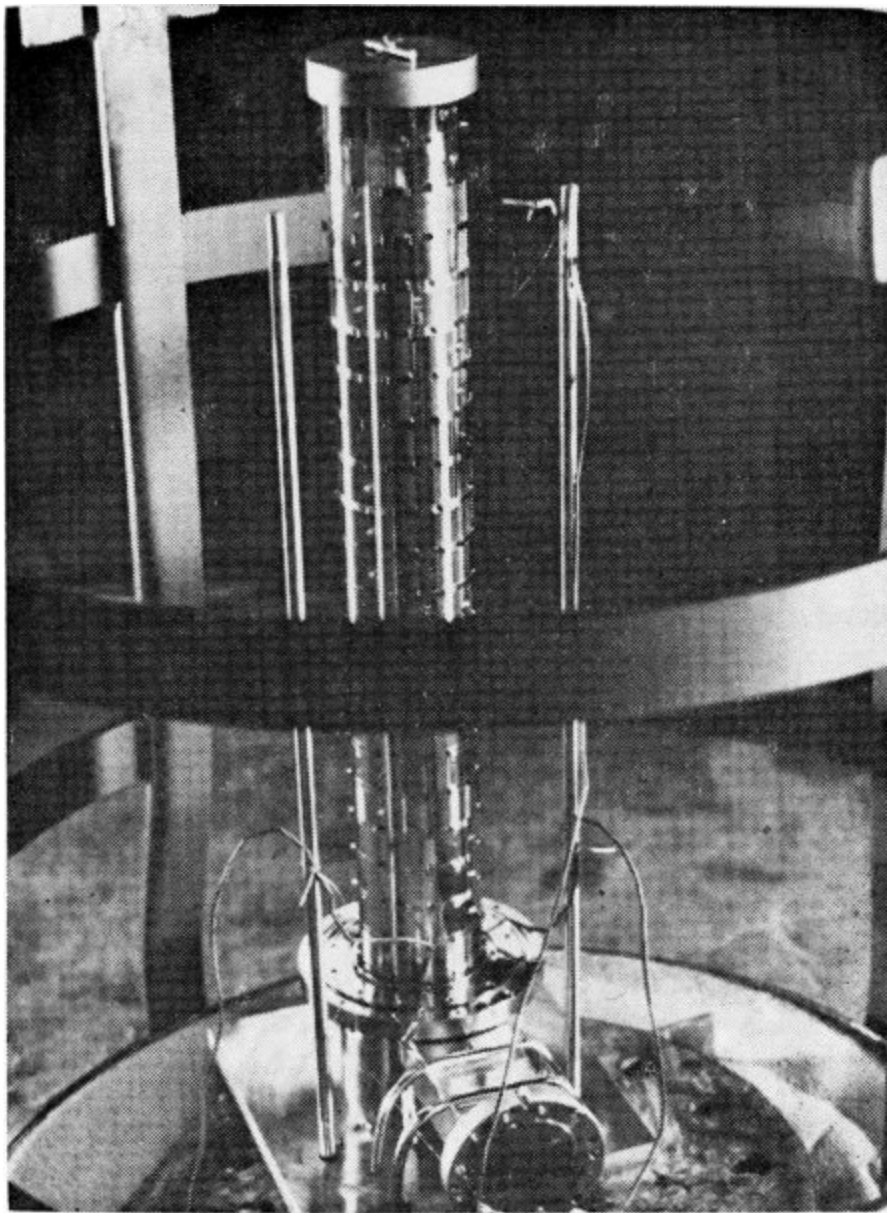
View of Accelerator Tube and Input Coupler Assembly with Thermocouples Fitted in Preparation for Hydrogen Furnace Brazing.
